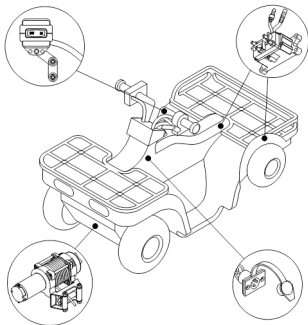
To install the complete kit, you will need to mount the winch, contactor handlebar mounted Mini-rocker switch and remote socket (optional on some models).
